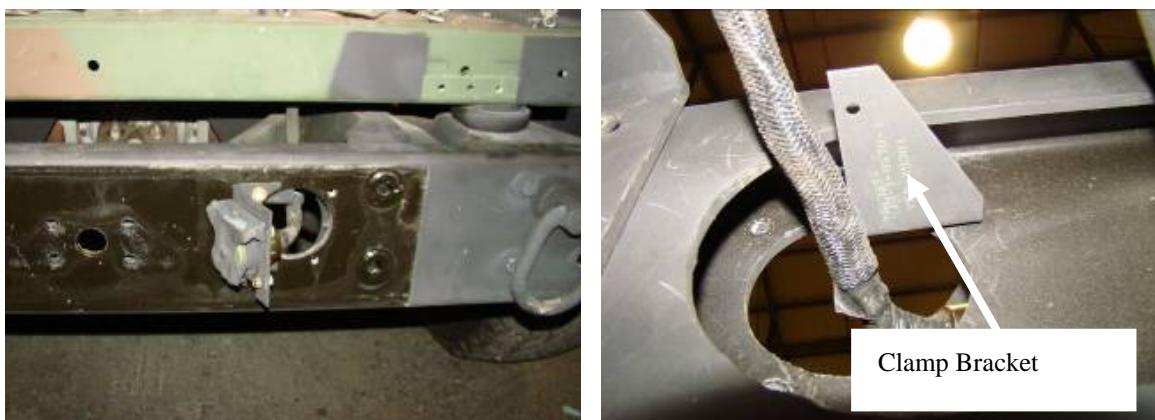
Receptacle Cable Secured to Clamp Bracket
